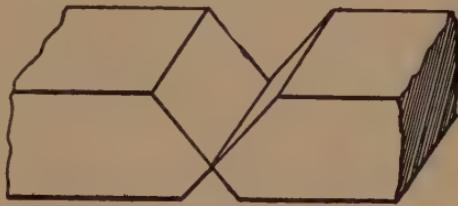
Preparation of Heavy Castings for Welding
